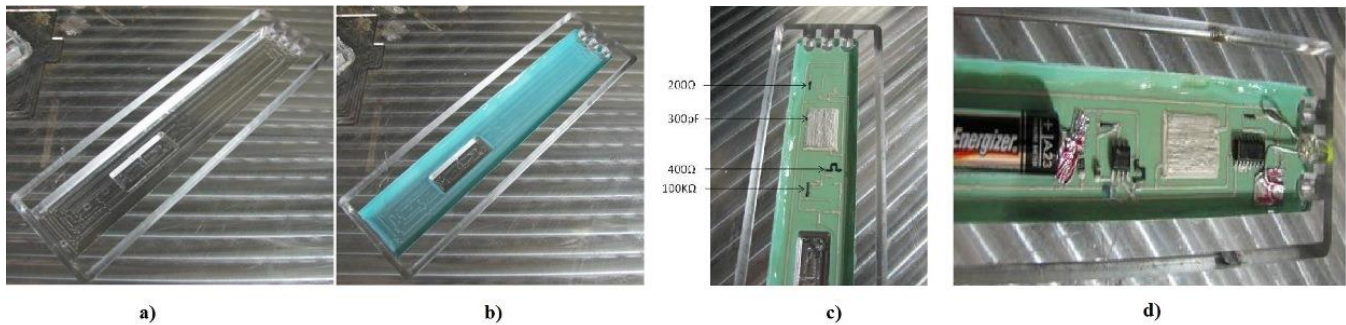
a) Machined cavity. b) Applied insulator. c) D.W. components. D) Completed. [26]
